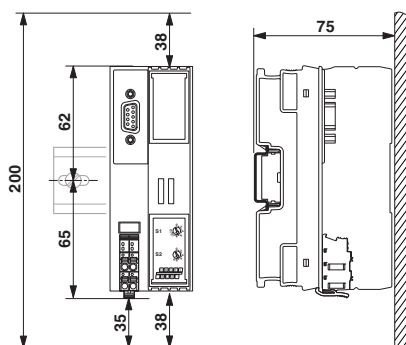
Mounting distances: bus coupler and AXC 105x controller (dimensions rounded)
